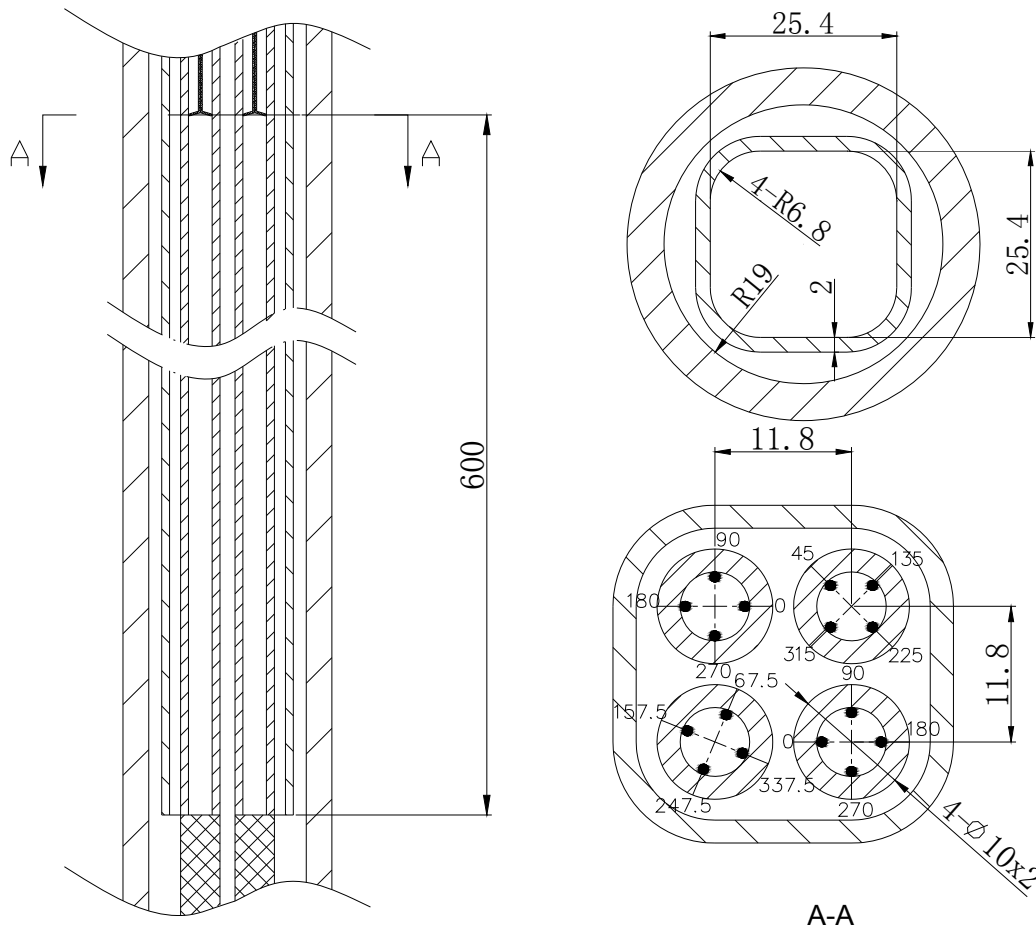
Configuration of thermocouples positions and cross-sectional view of test section
